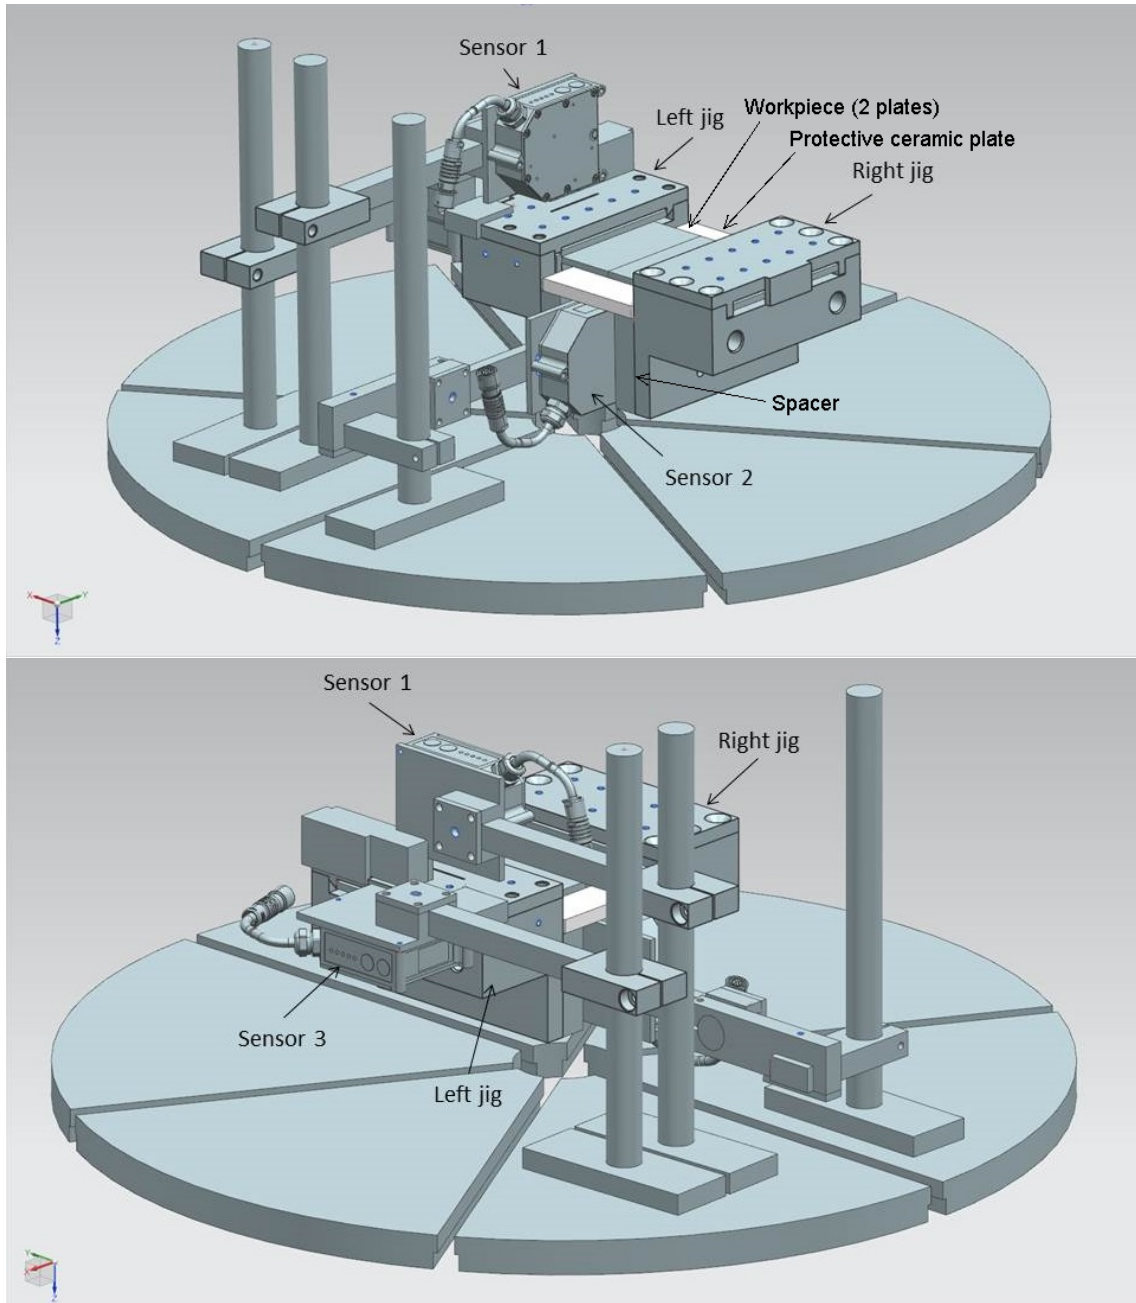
Welding assembly designed for displacement measurements during and after a welding test. The two pictures show views from two opposite sides.
